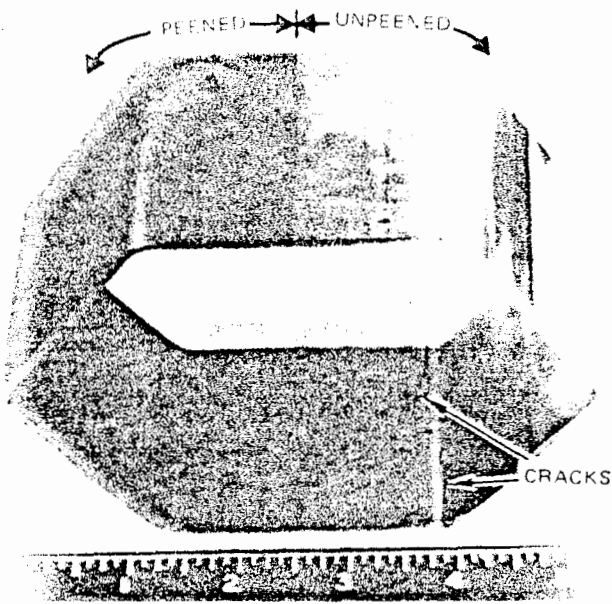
Type 316 stainless steel hexagonal tube (20 pct C.W.) showing stress corrosion cracks in unpeened surface after 23 h $MgCl_2$ test. (Cracks were visible in unpeened surface after 3 h in $MgCl_2$ test. No cracks were detected in the peened surface.)
